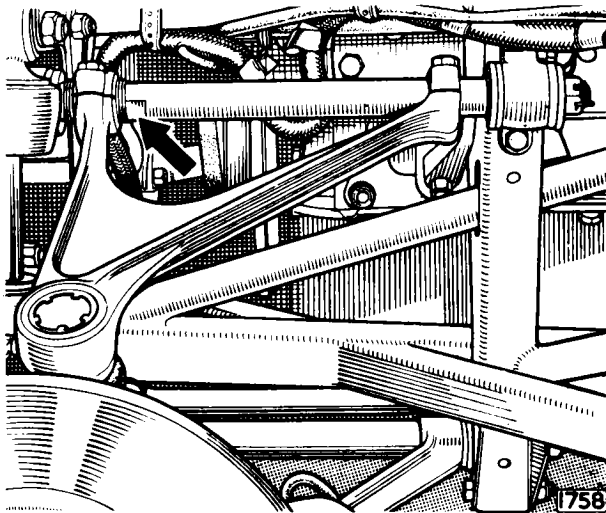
The castor angle is adjusted by rotating the shaft indicated by the arrow.
